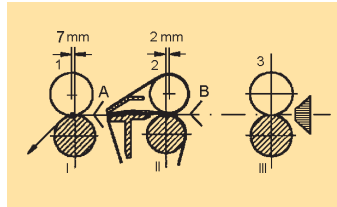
Fig. L: Fronthang of front top roller and backhang of middle top roller and arrangement of condensers
